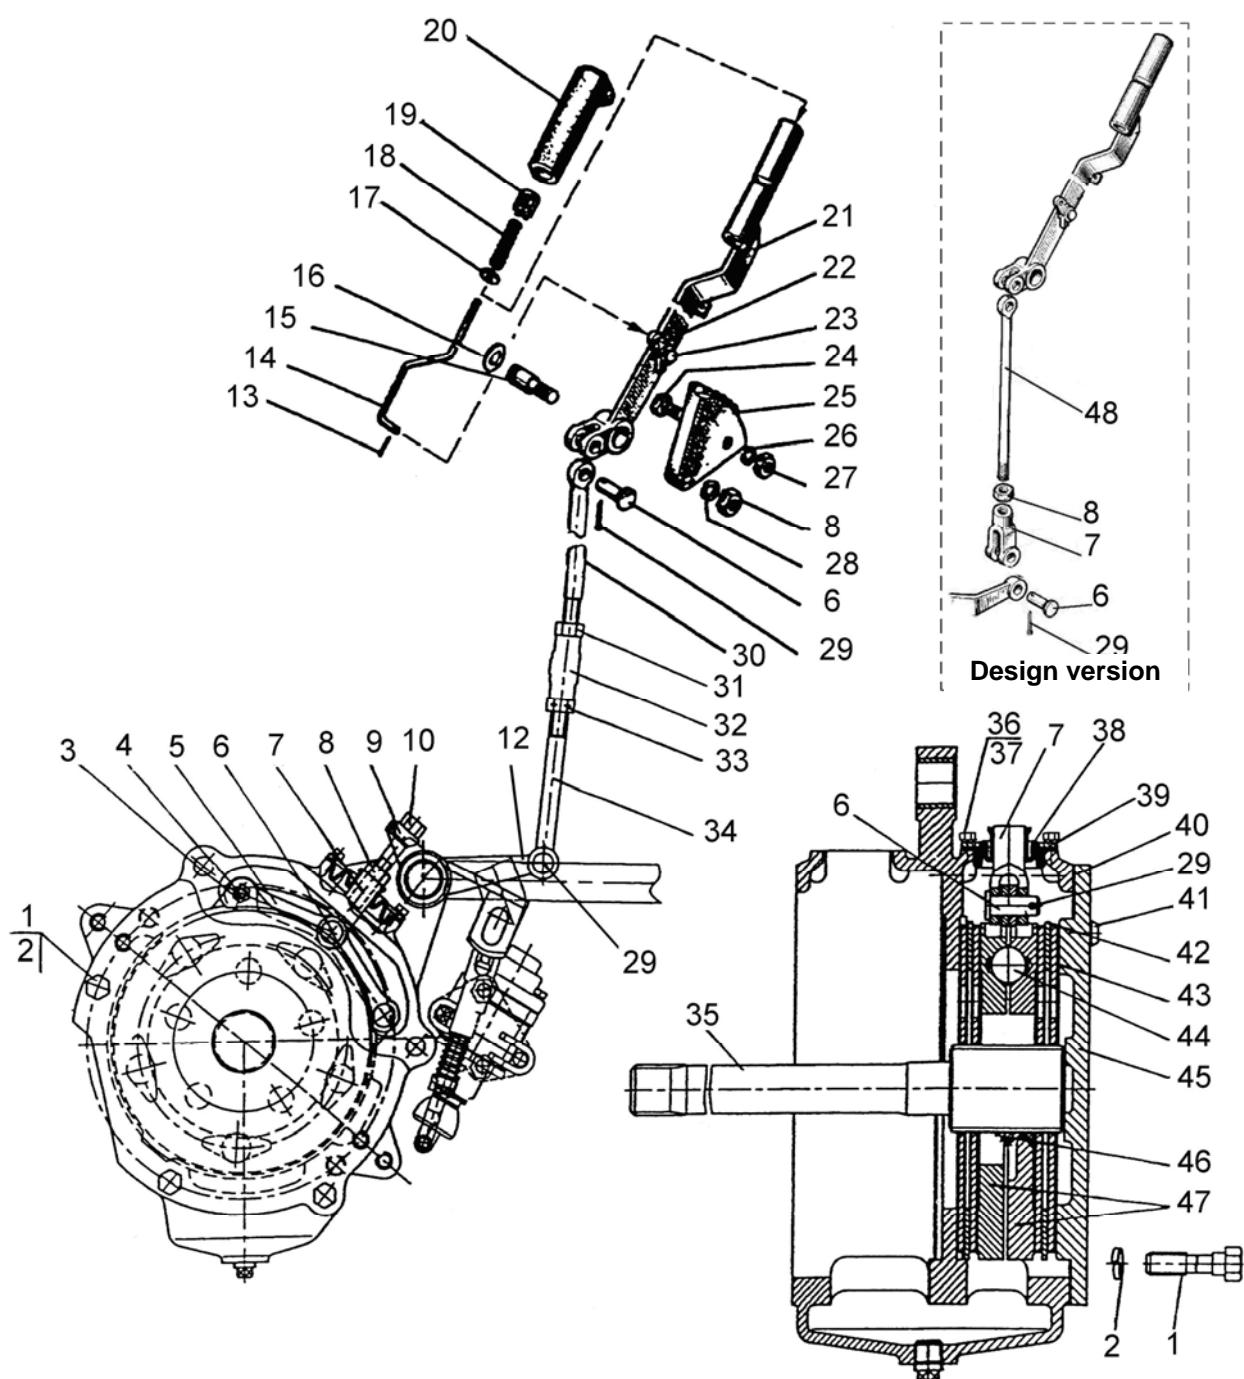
Parking brake. Parking brake control (for wet brakes)
